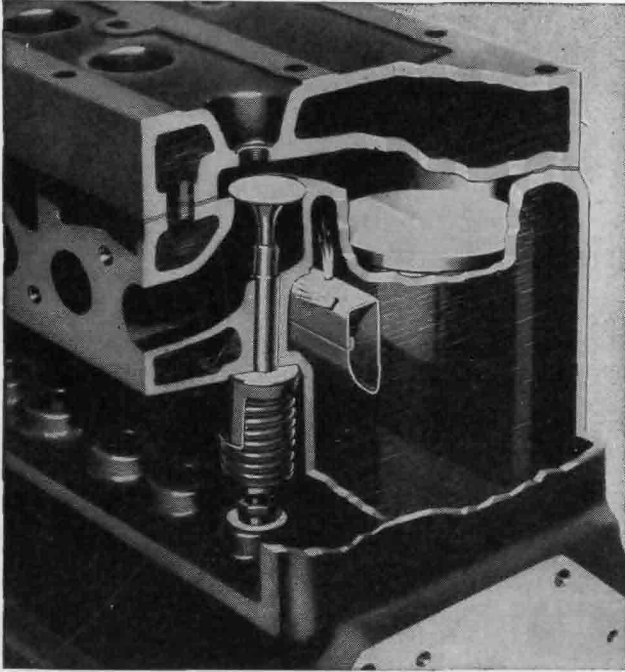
Use of water-distributing tube to cool valves. (*Pontiac Motor Division of General Motors Corporation*)
